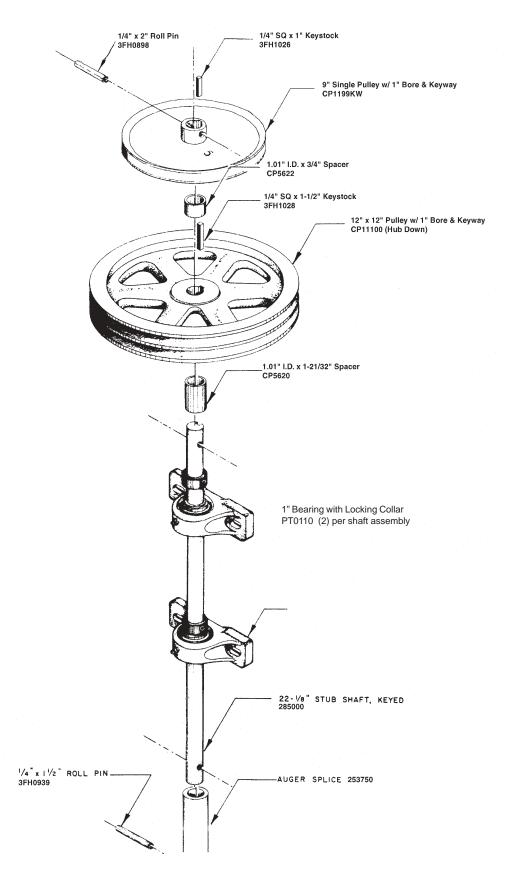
Stub Auger Assembly No. 5 (280005)
